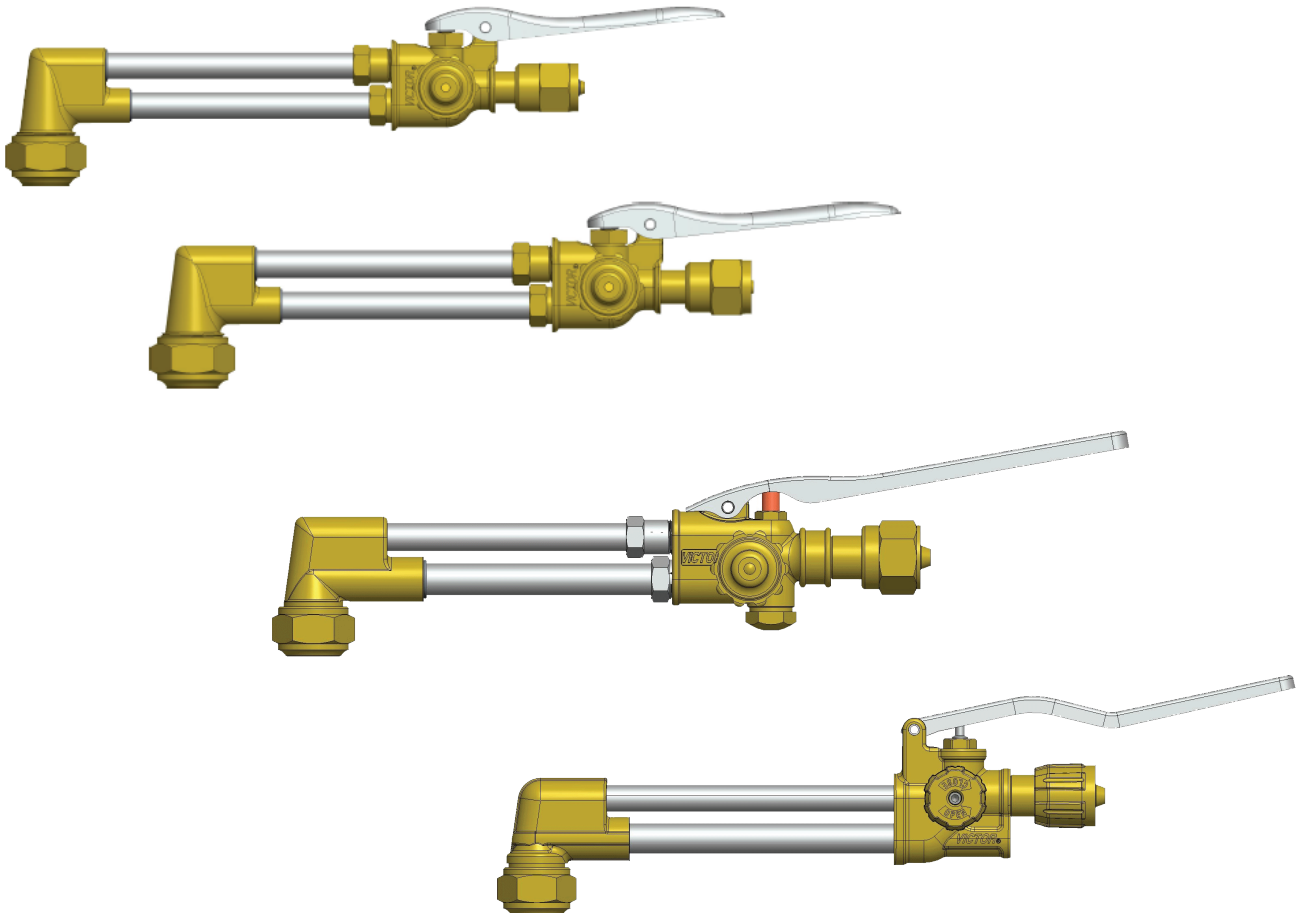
CA 2460 and CA 2470 Cutting Attachments
